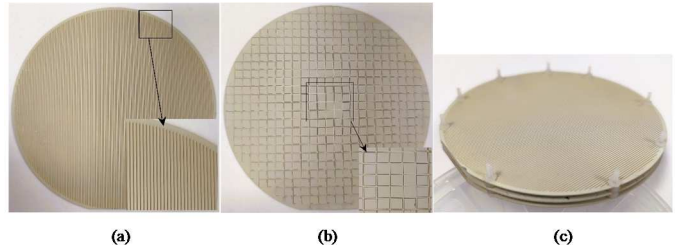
Photos of the fabricated (a) gratings, (b) metasurfaces and (c) assembled three-layer lens consisting of a metasurface layer sandwiched by two cross-polarized gratings.
